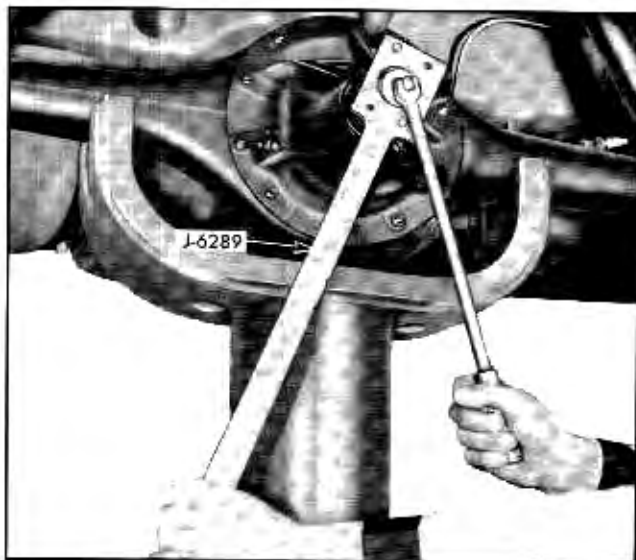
Holding Companion Flange With Holding Tool J-6289
